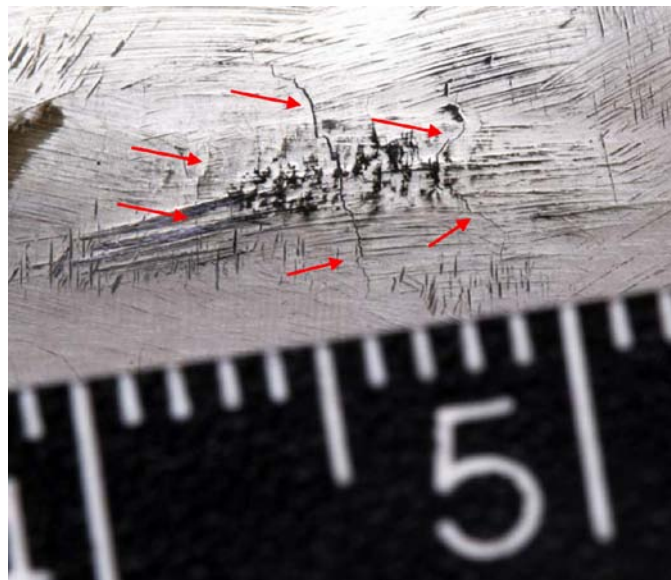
Thermal Fatigue Cracks in Test Block 5.7
